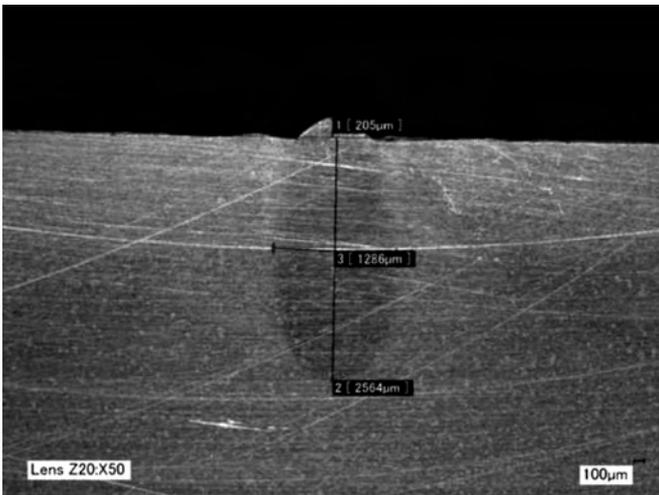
Picture of blind weld (bead on the plate), with 4 mm defocus.
